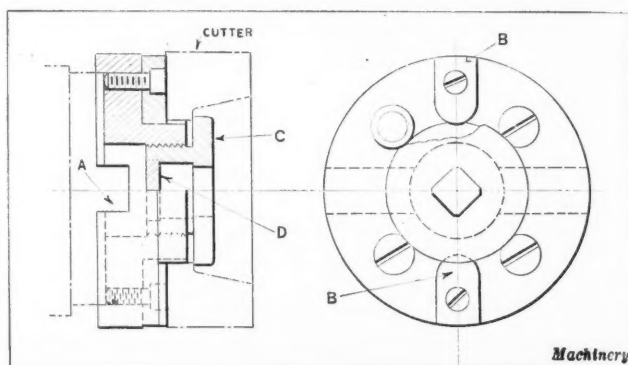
Construction of an Adapter for attaching a Cutter to the End of a Milling Machine Spindle
